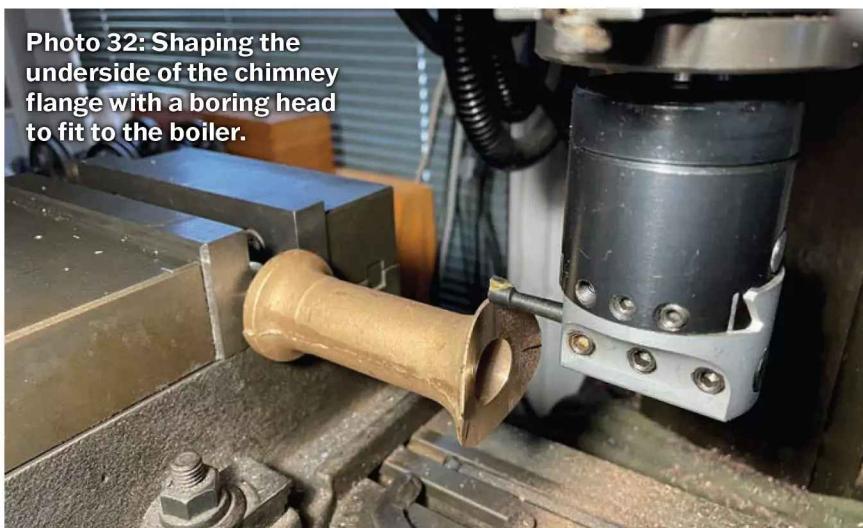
Shaping the underside of the chimney flange with a boring head to fit to the boiler.
